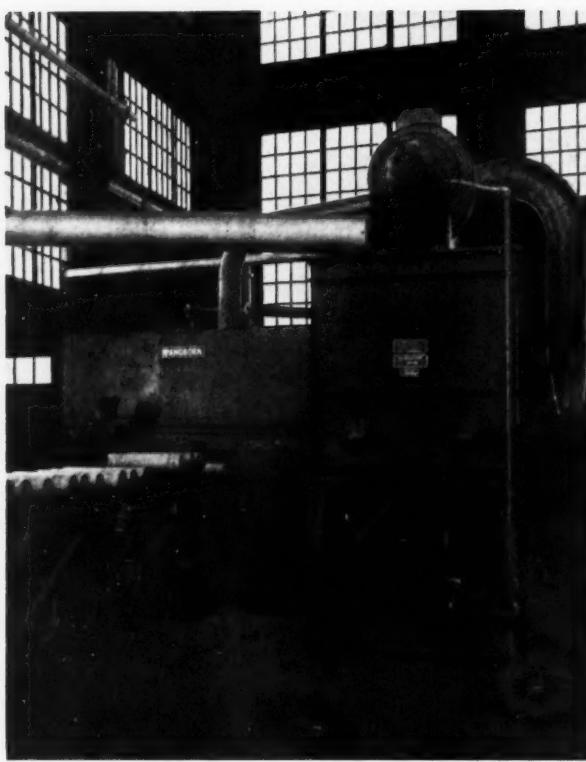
Loading End of Pangborn Blast-cleaning Equipment, which Handles 155-millimeter Shells in the Plant of the Baldwin Locomotive Works
